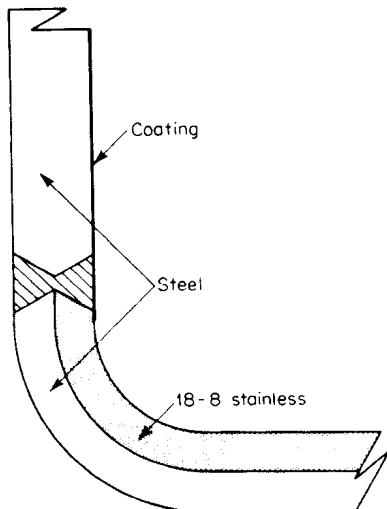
Detail of welded steel and stainless clad tank construction.
